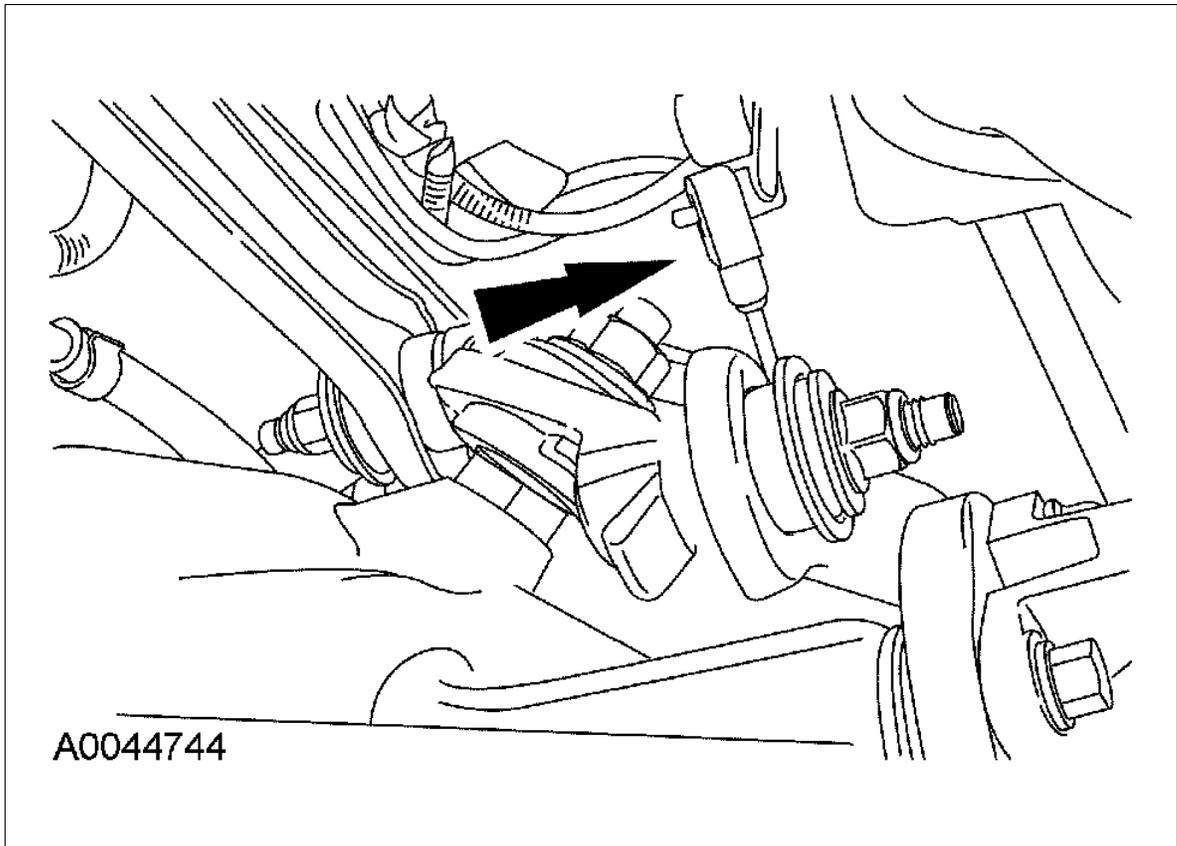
Removing Rear Stabilizer Bar Bracket Bolts
